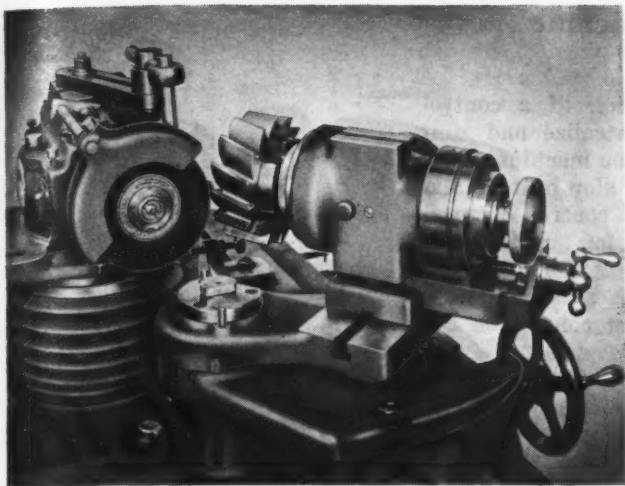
Cincinnati Grinding Attachment Set up for Grinding a Radius on Teeth of End-mill
